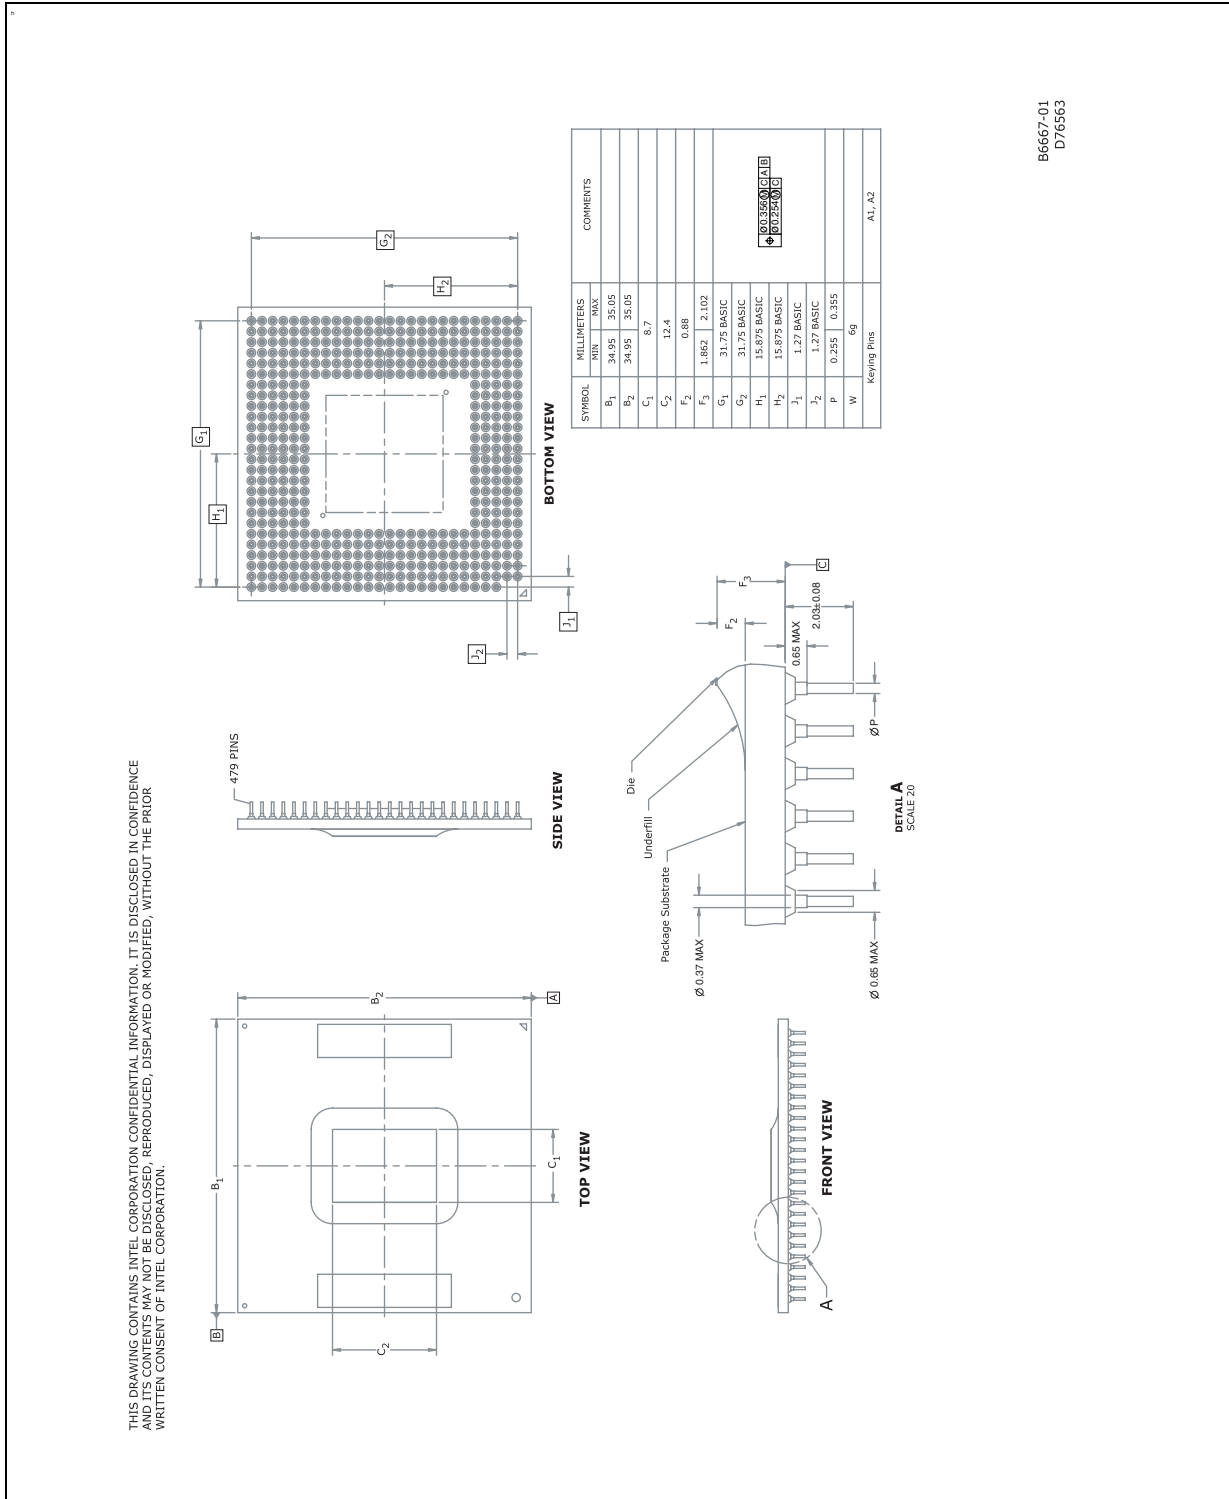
6-MB and 3-MB on 6-MB Die Micro-FCPGA Processor Package Drawing (Sheet 2 of 2)
